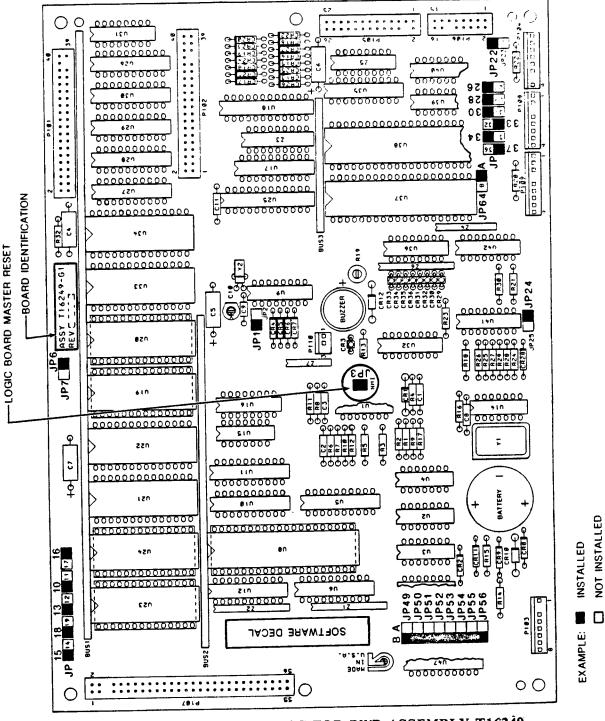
JUMPER SETTINGS FOR PWB ASSEMBLY T16249
